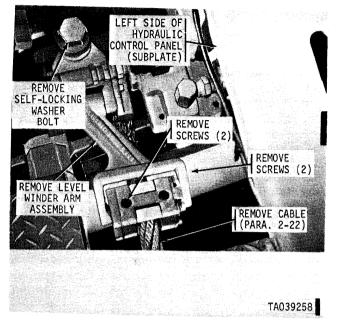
Main winch cable and level winder arm assembly—removal and installation.
